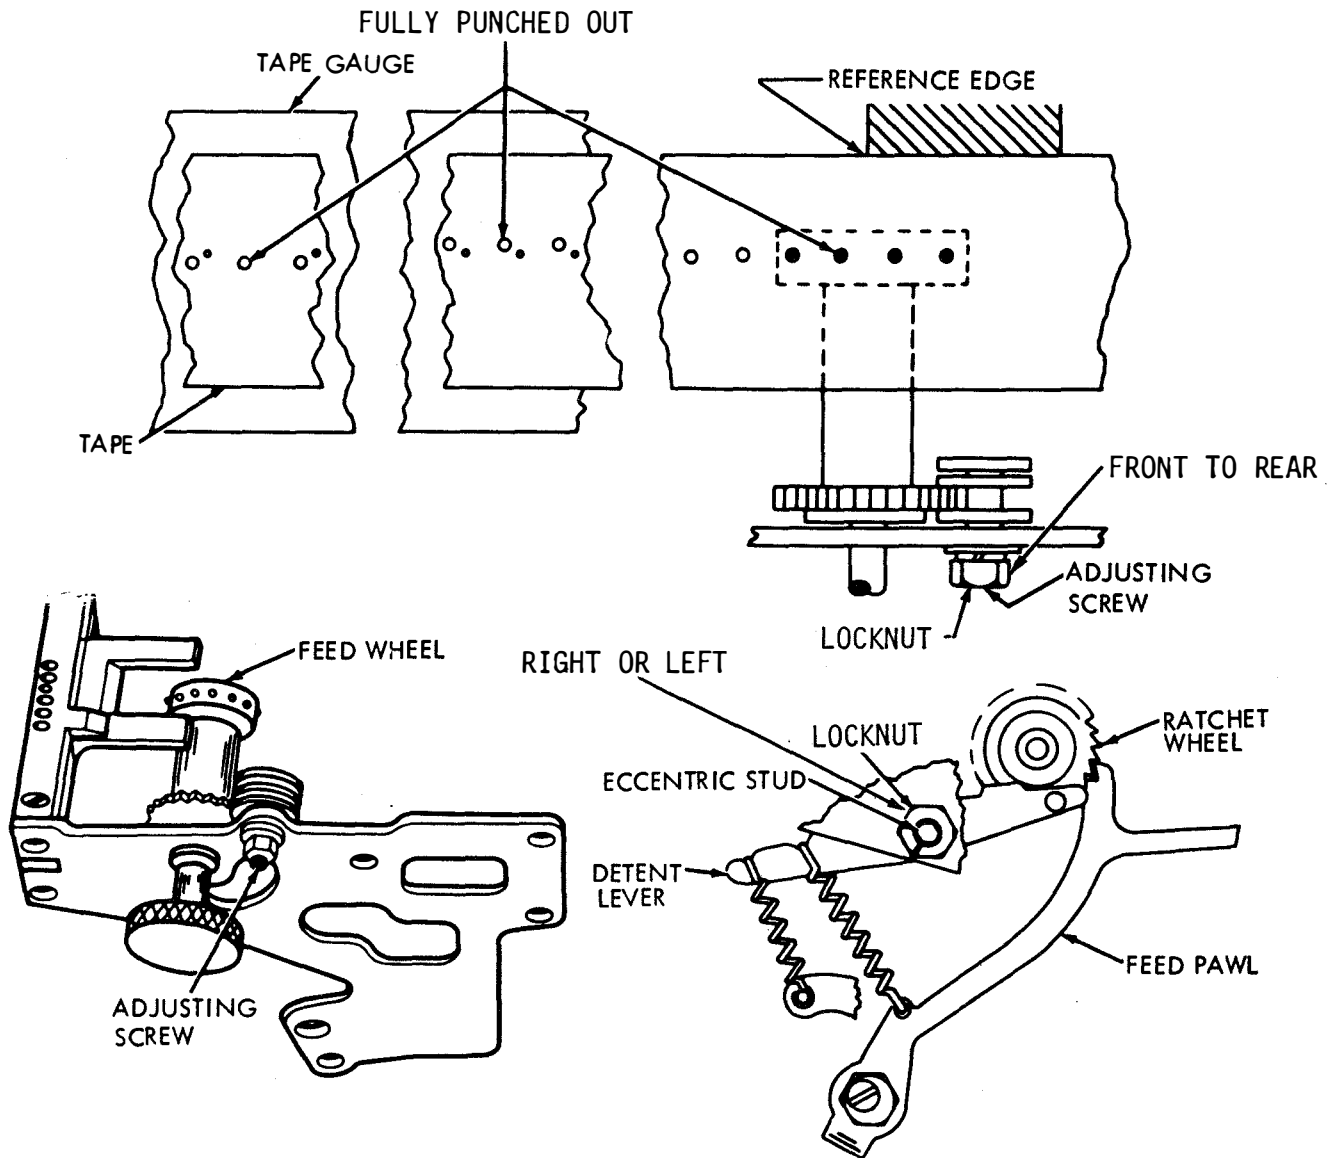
Feed Wheel Indentation Alignment (Fully Perforated Tape With Indentations of Feed Wheel Fully Punched Out)
